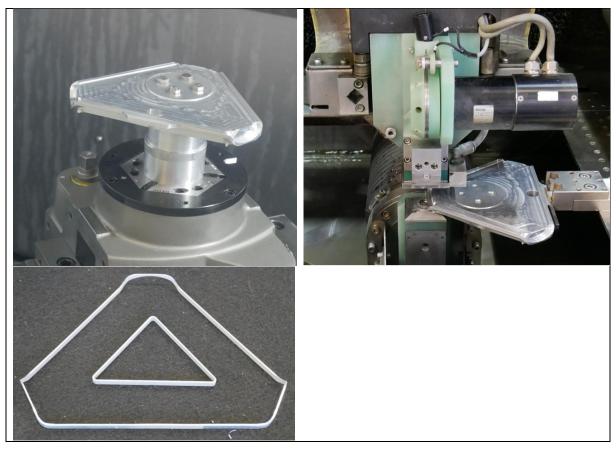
Milling and EDM of the outer filler material for the final vacuum vessel
